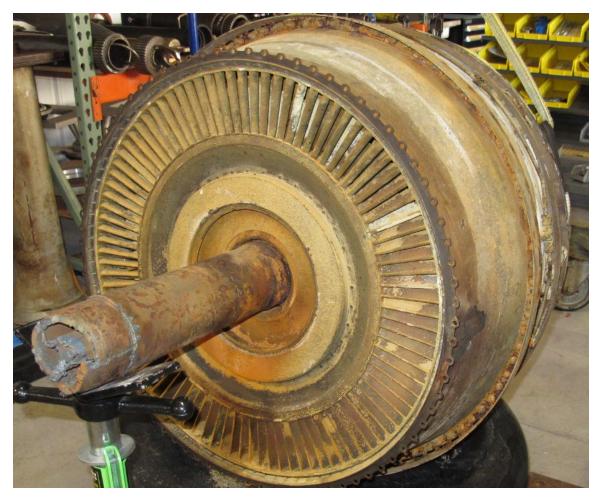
Front view of No. 2 engine low turbine. The shaft was cut to aid disassembly
